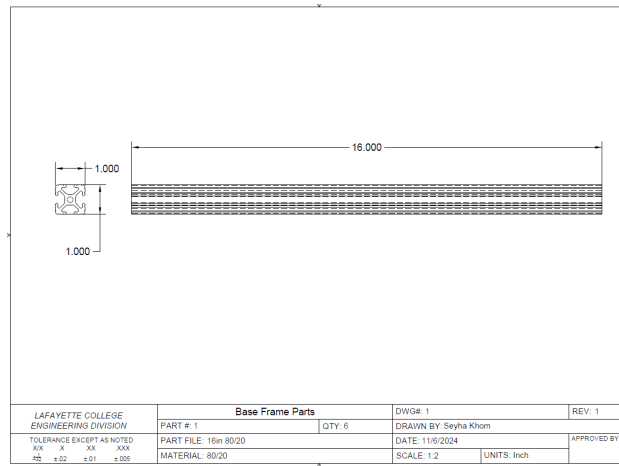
This is a drawing sent to the machine shop. This drawing is requesting from the machine shop to cut 80/20 that is 1 inch by 1 inch in size. There are six pieces cut at 16 inches long. These pieces are used for the left and right of the box containing the electronics.
